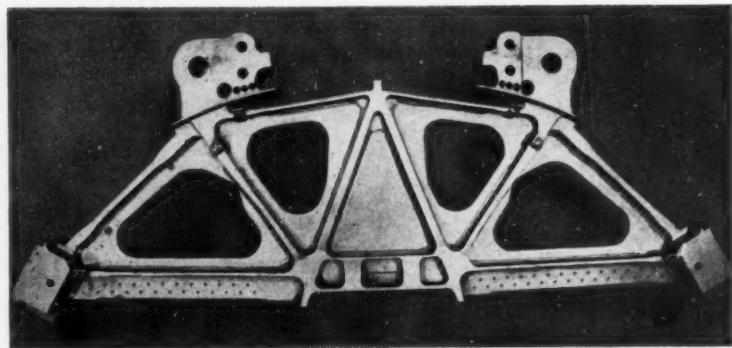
The Crown of the Bulkhead Seen in Fig. 2. Two of the Flame-cut Spiders Shown in Fig. 3 have been Welded together, with a Steel Plate Sandwiched Between Them
